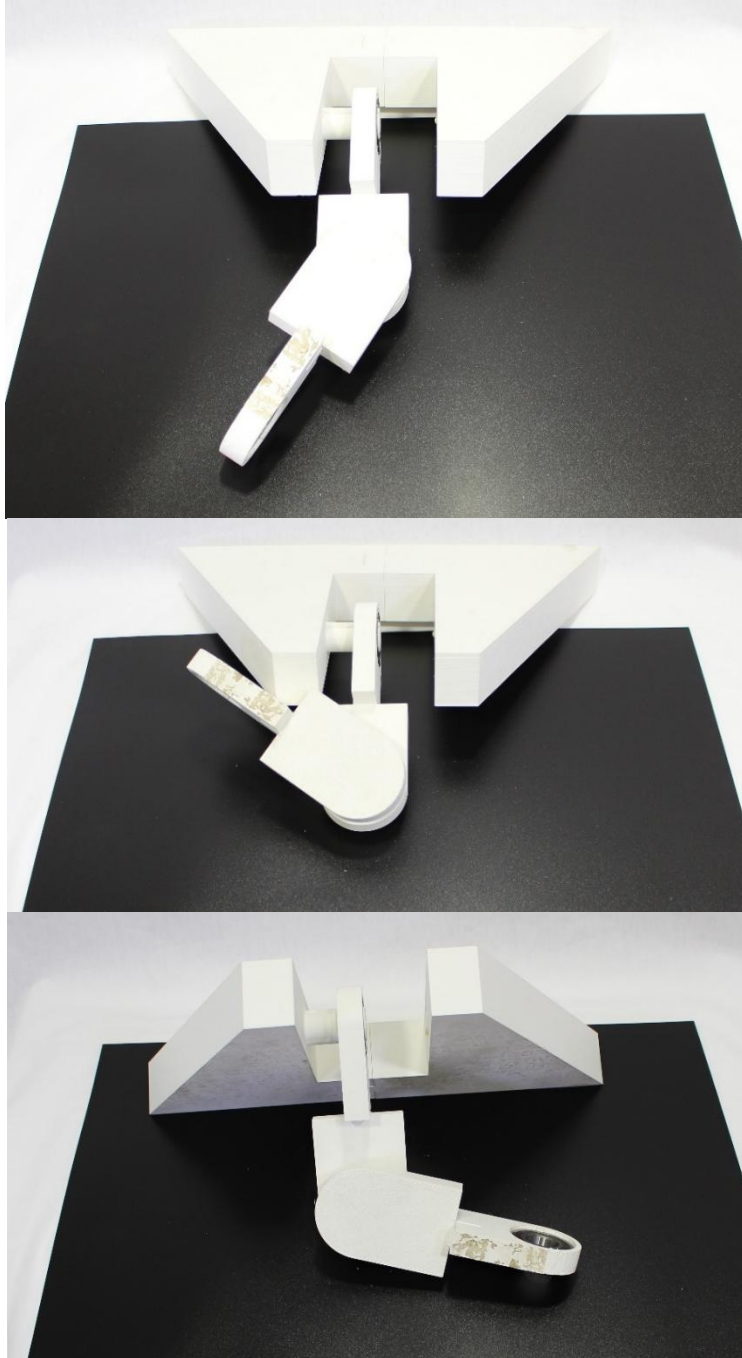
Yaw and pitch rotation check of Dual Axis one way bearing systems- mark 3- assembly type 3
